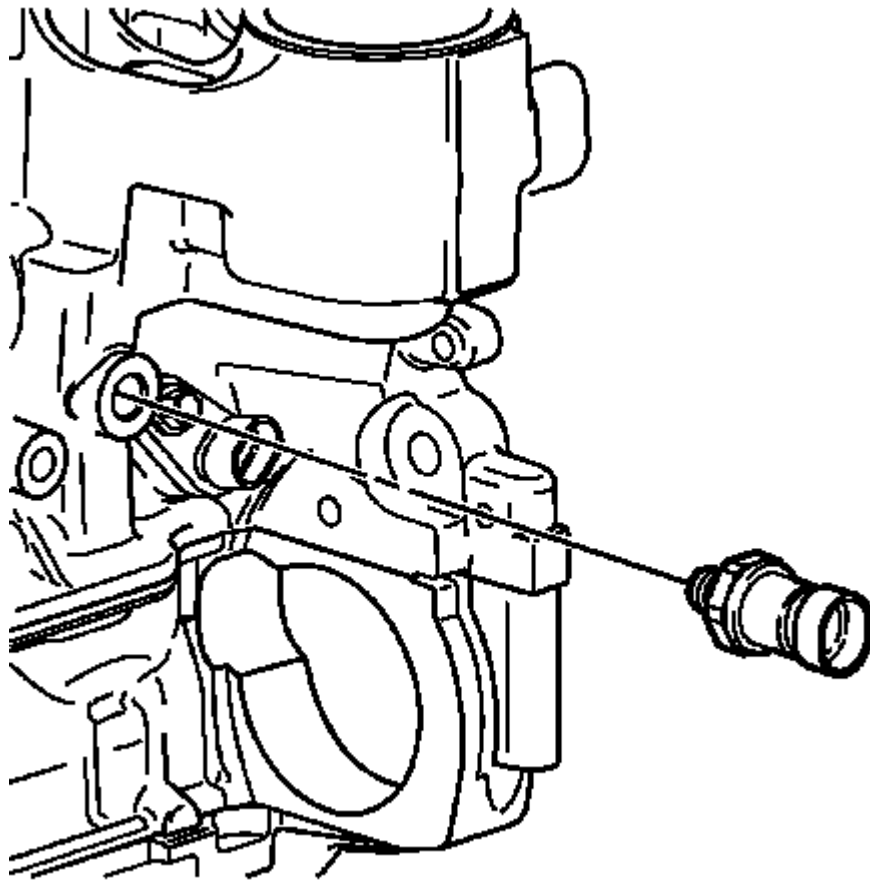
View Of Engine Oil Pressure Sensor
